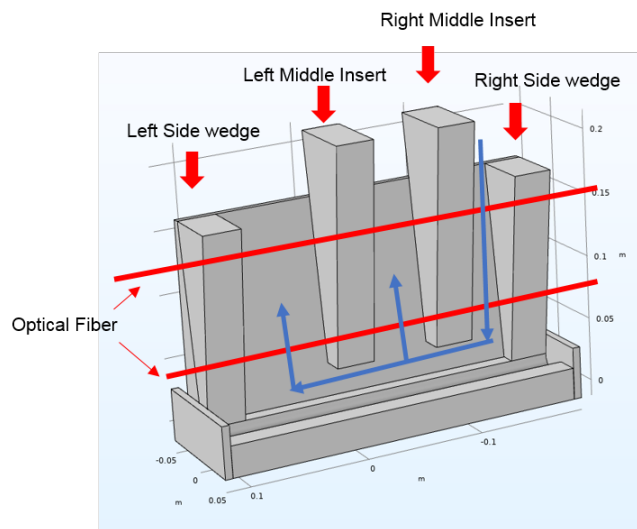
ACRC Wedge Mold: Top and Lower Optical Fiber positions in Wedge Mold with blue arrows indicating metal flow direction during mold filling.
